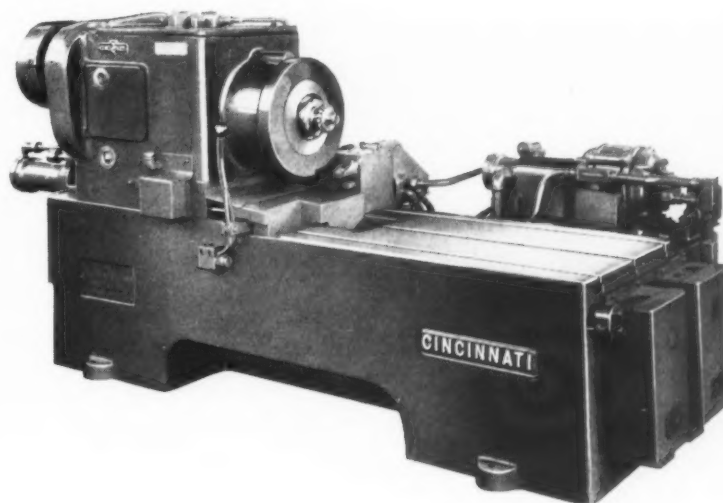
Machine Used for Finish-milling the Bottom Flange of Cylinder Blocks
